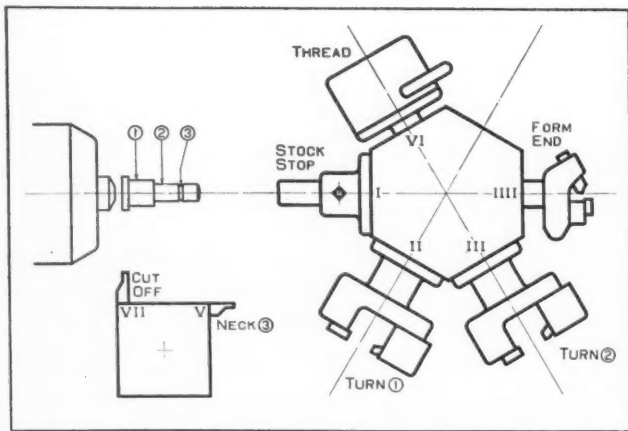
Tooling Lay-out for Turret Lathe for Making Governor Connection Pins in Lots of Six
